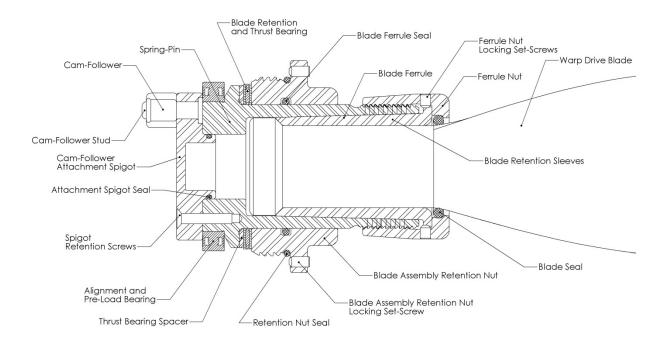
General Layout of Blade Assembly on 3 series (arrangement of seals may differ on production examples)
